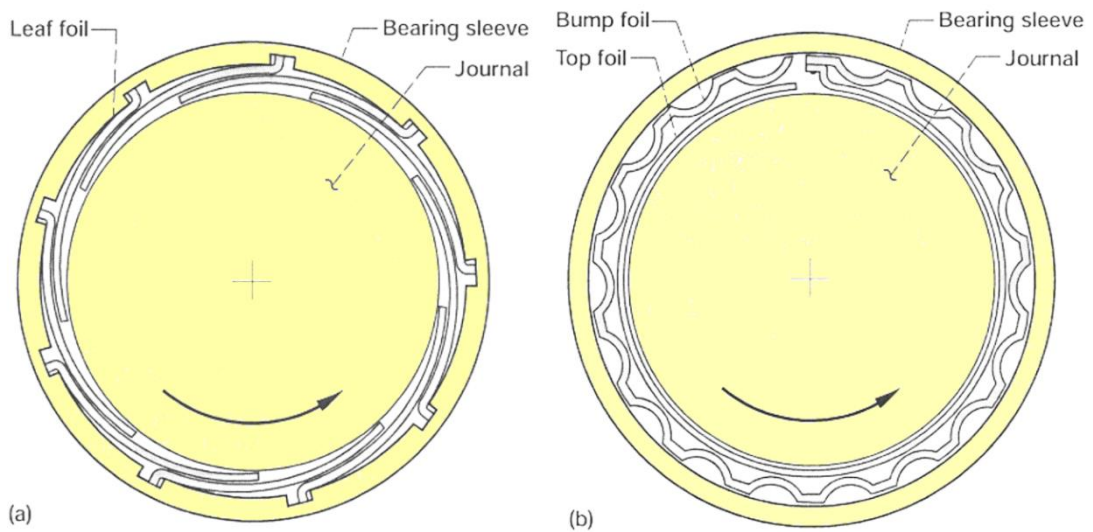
First generation compliant foil bearings a) Leaf type foil bearing, b) Bump type foil bearing [80]
